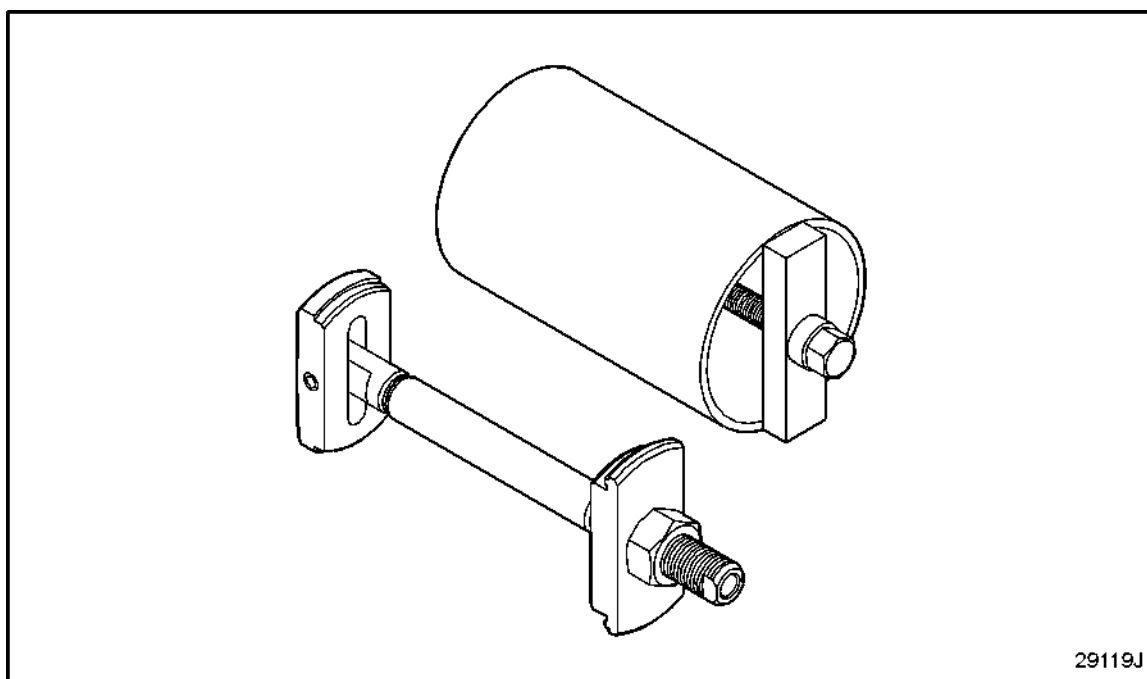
Liner Remover (Screw Type),J 24563-A
